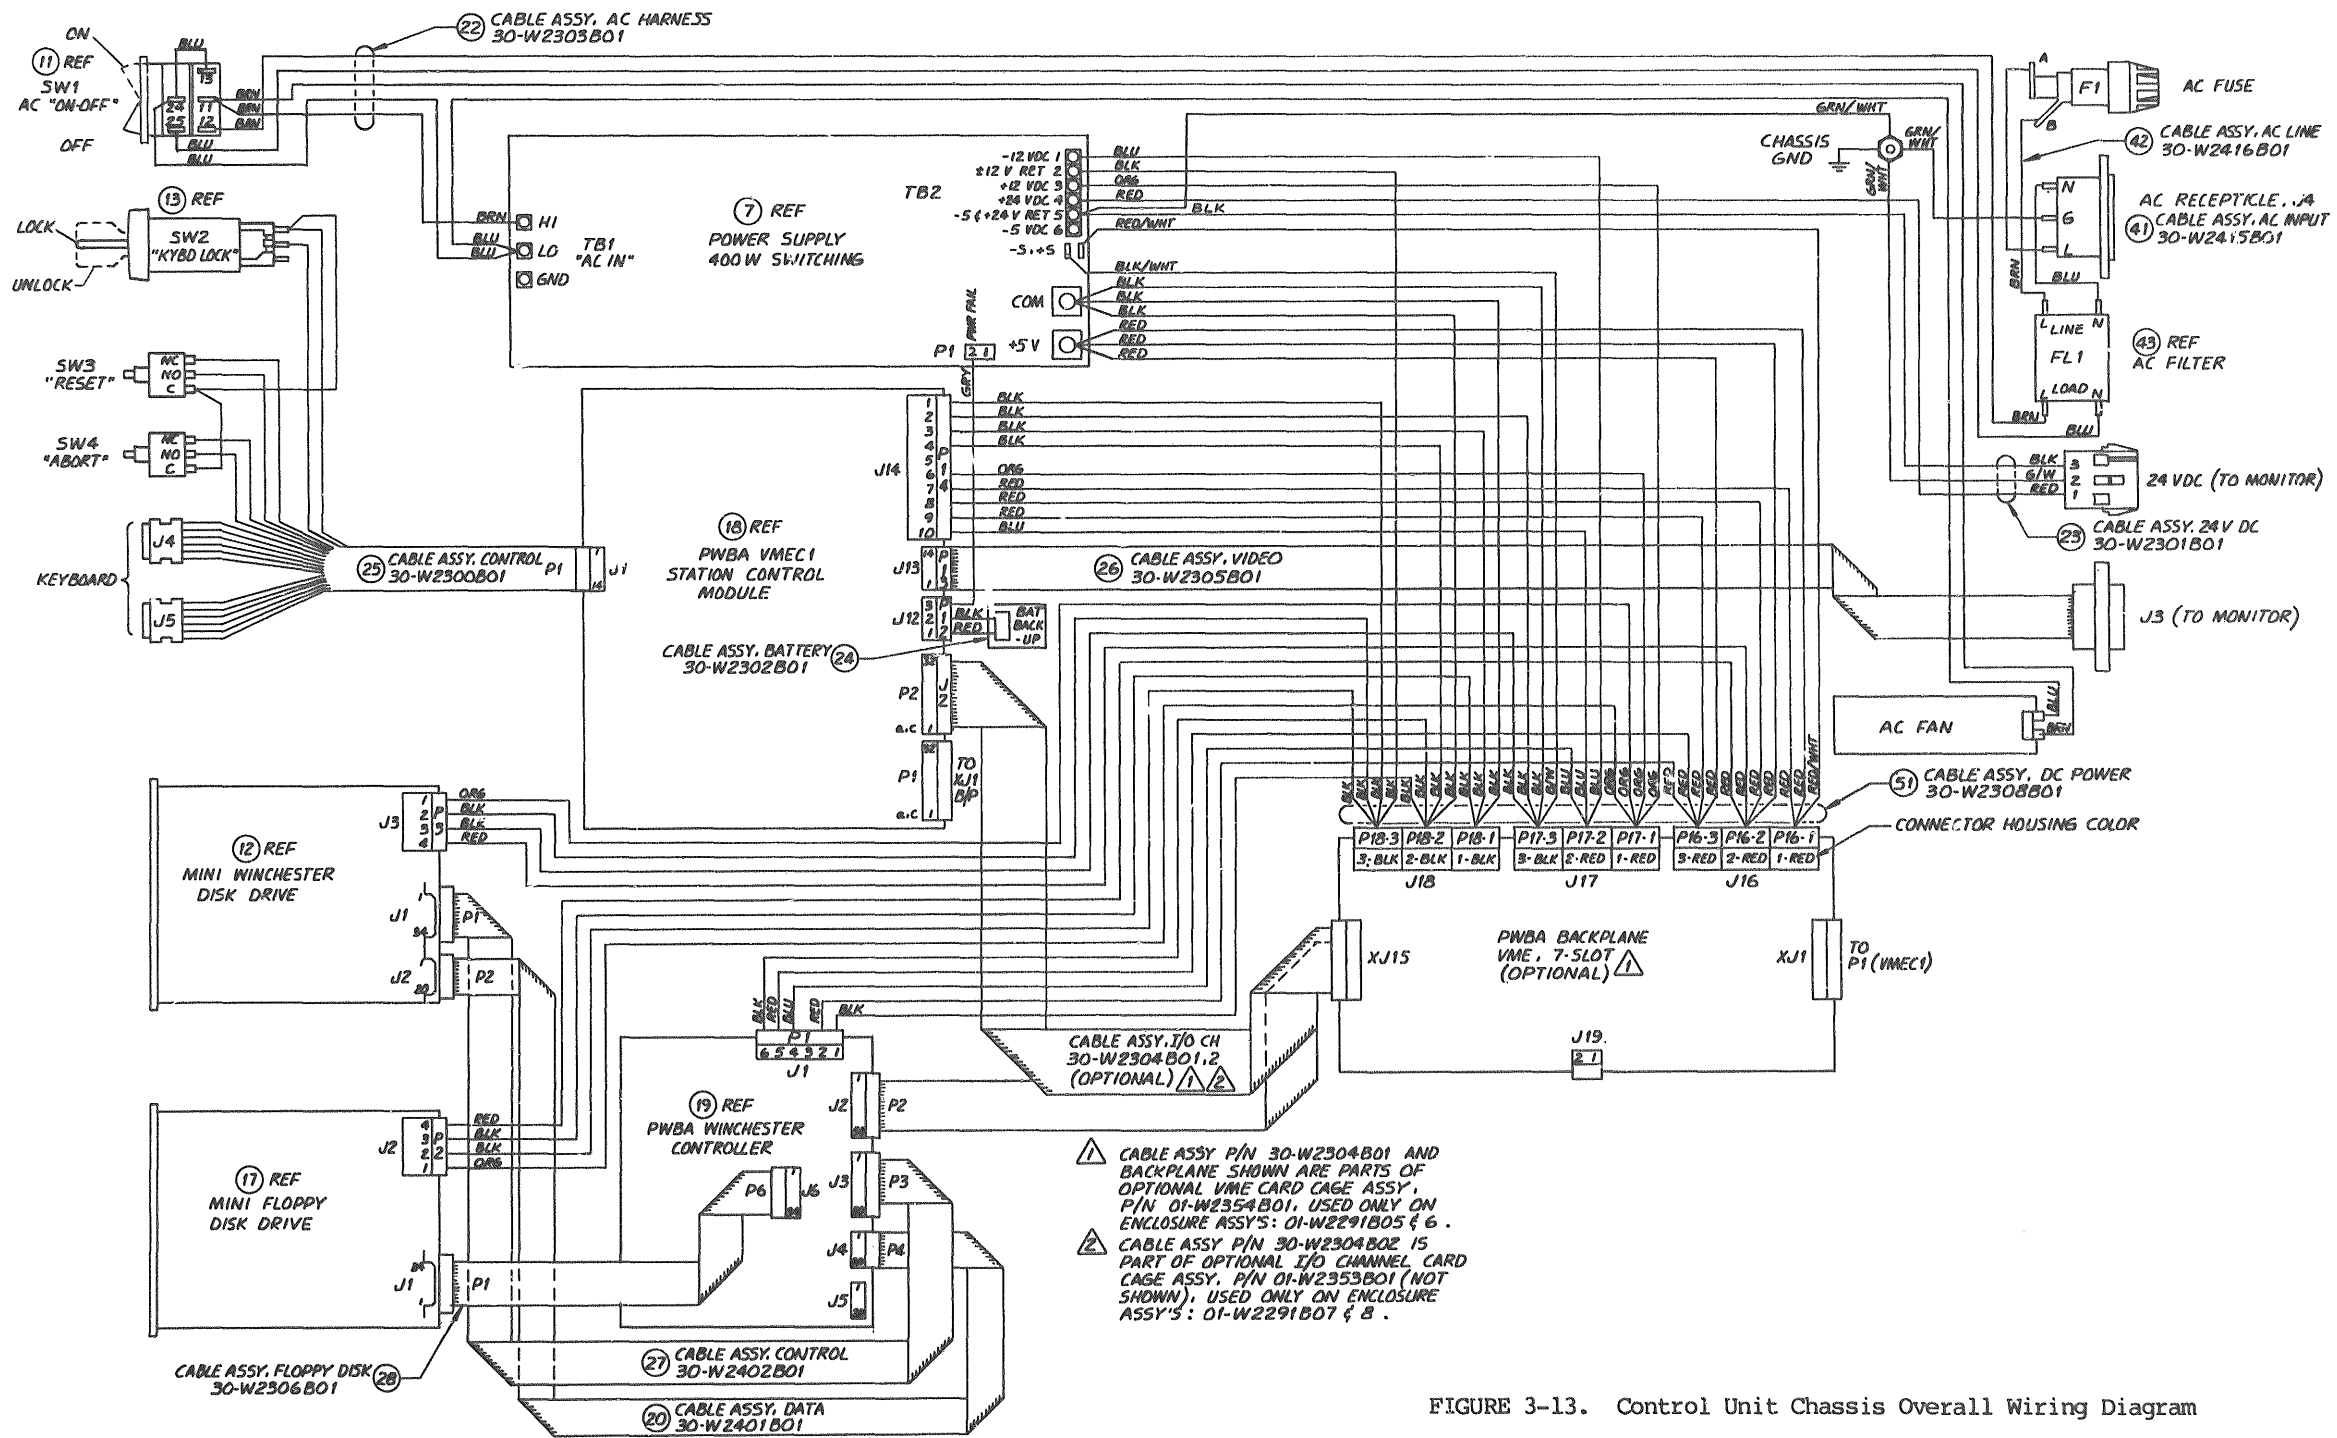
Control Unit Chassis Overall Wiring Diagram
